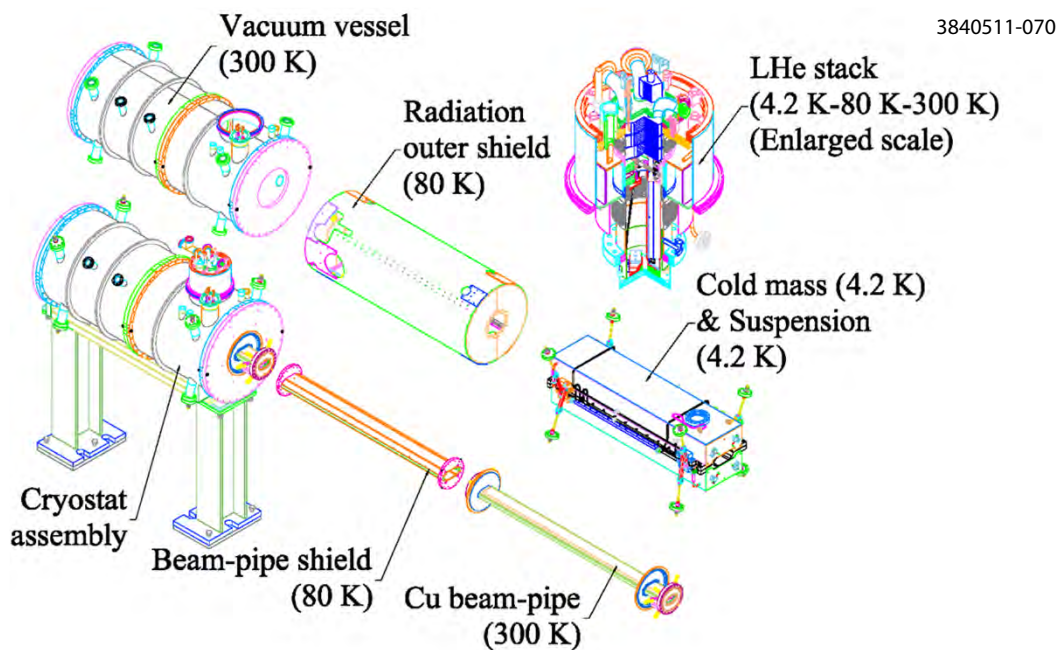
Exploded view of the structure of a CESR-c superconducting wiggler assembly.
